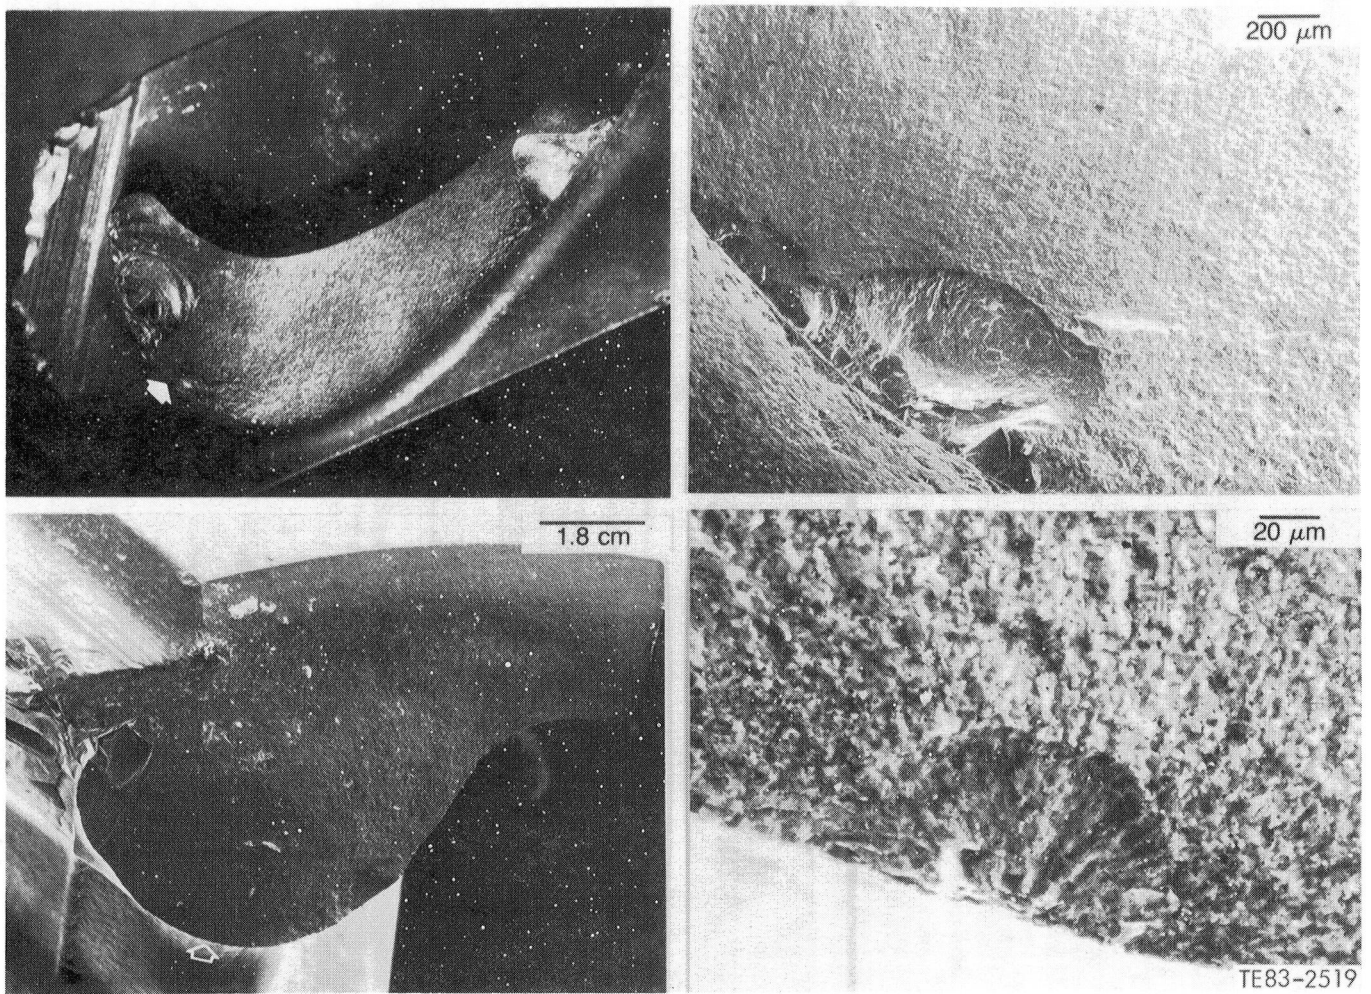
Example of blade primary fracture shearing through airfoil (note penny-shaped crack at secondary origin.)
